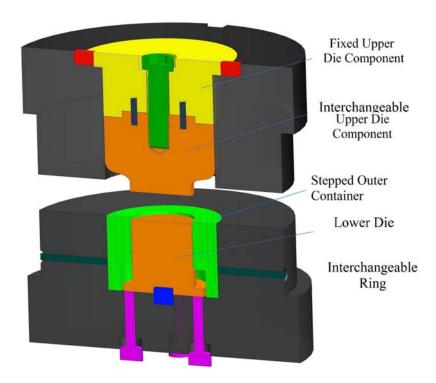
Assembly of Die Set for Coin Diameter of 50 mm
